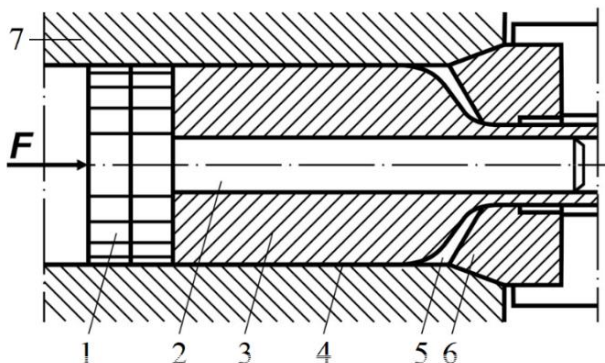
Diagram of the working unit of the installation with a horizontal hydraulic press: 1 – press washer; 2 – mandrel; 3 – sleeve; 4 – glass lubricant on the contact surface of the metal container; 5 – lubricating washer; 6 – die; 7 – container.
